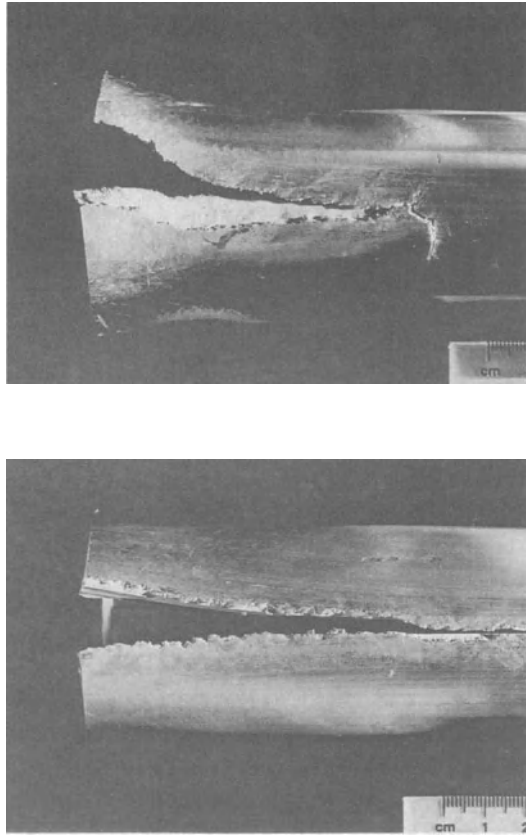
(a) Appearance of transverse weld in a 6082 hollow that failed drift testing. (Courtesy of Alcan International.)
